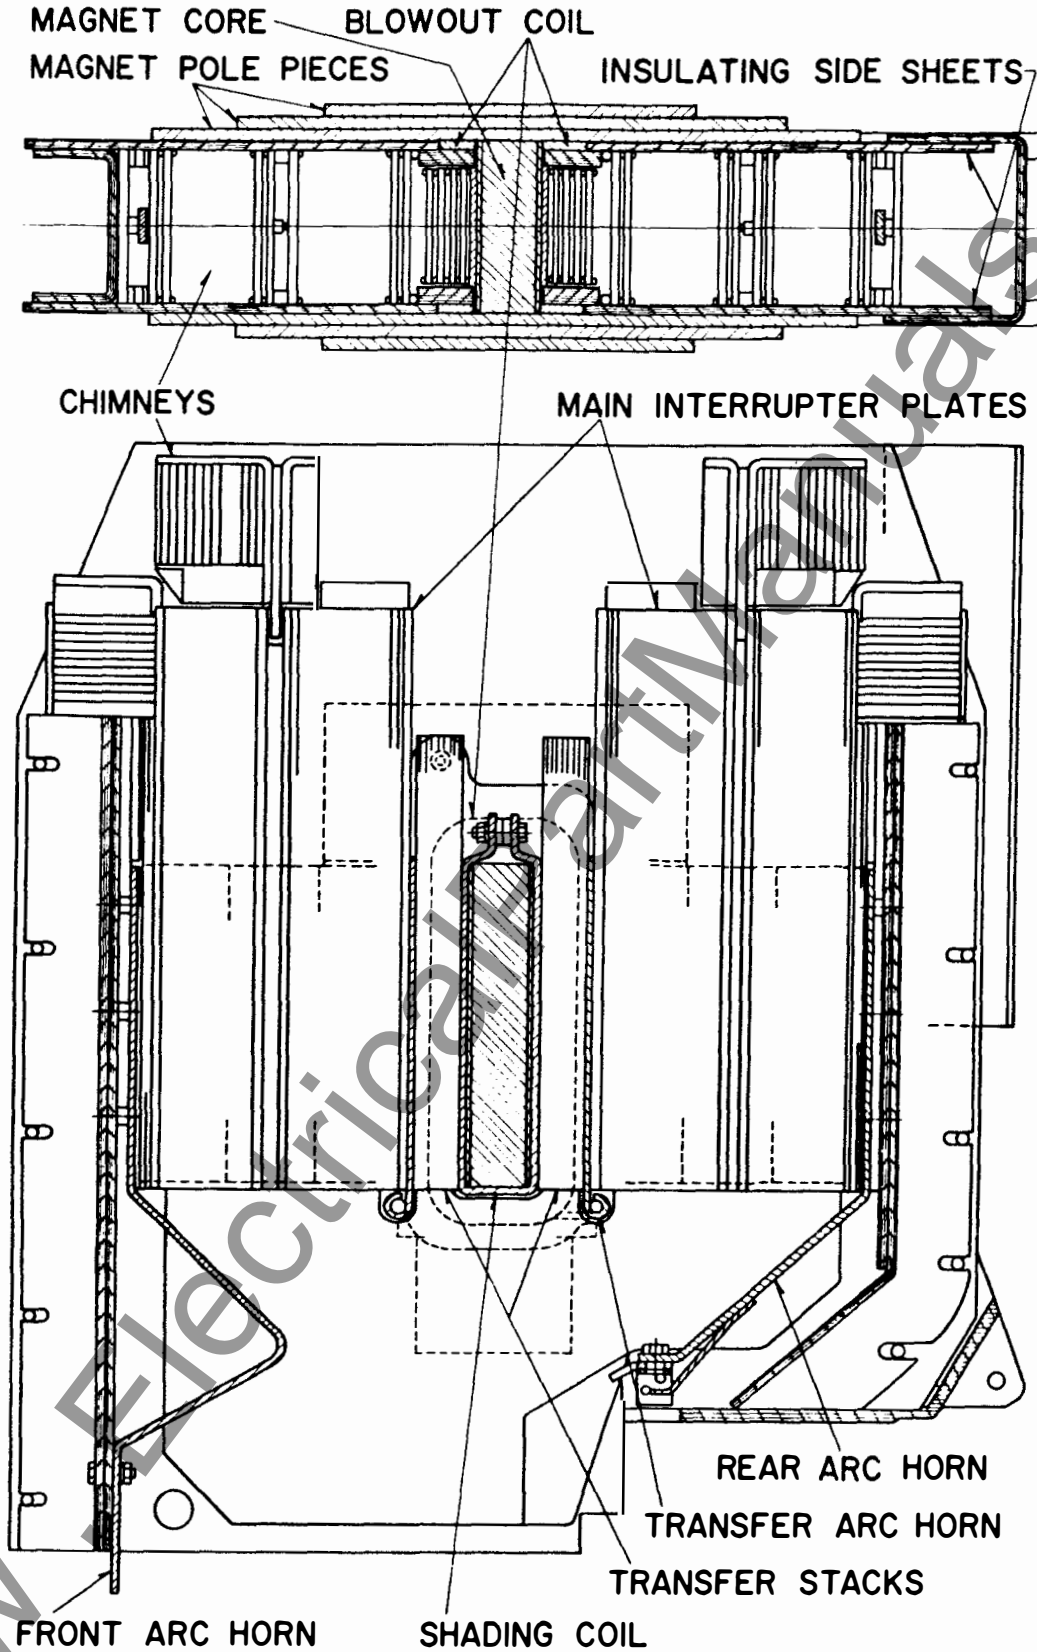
SCHEMATIC CROSS-SECTION OF AN ARC CHUTE SHOWING COMPONENT PARTS
